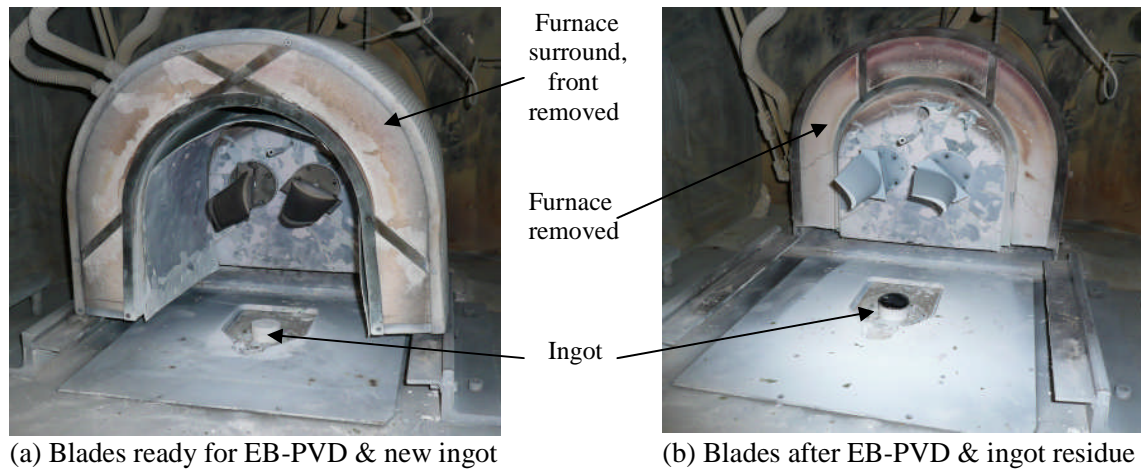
Photographs of blades mounted in the plater before and after EB-PVD
